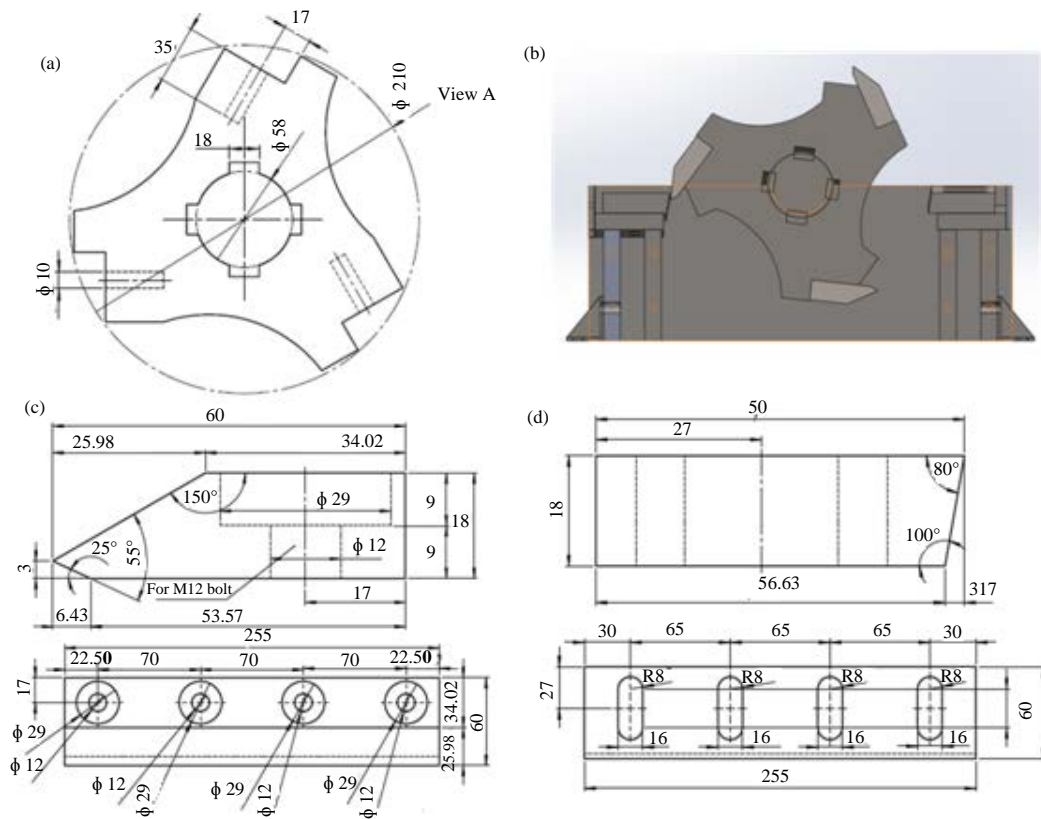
(a-d): (a) Drawing of the rotary knives fixture, (b) CAD image of the rotary knives fixture, (c) Drawing of the rotary knife and (d) Drawing of the fixed knife
